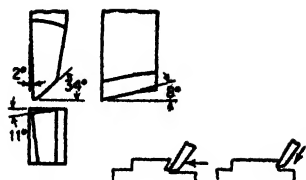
Tool No. 9. (a) Right-hand dovetail end-cutting roughing tool for cast iron; (b) Application of the tool. (*The G. A. Gray Company*)
